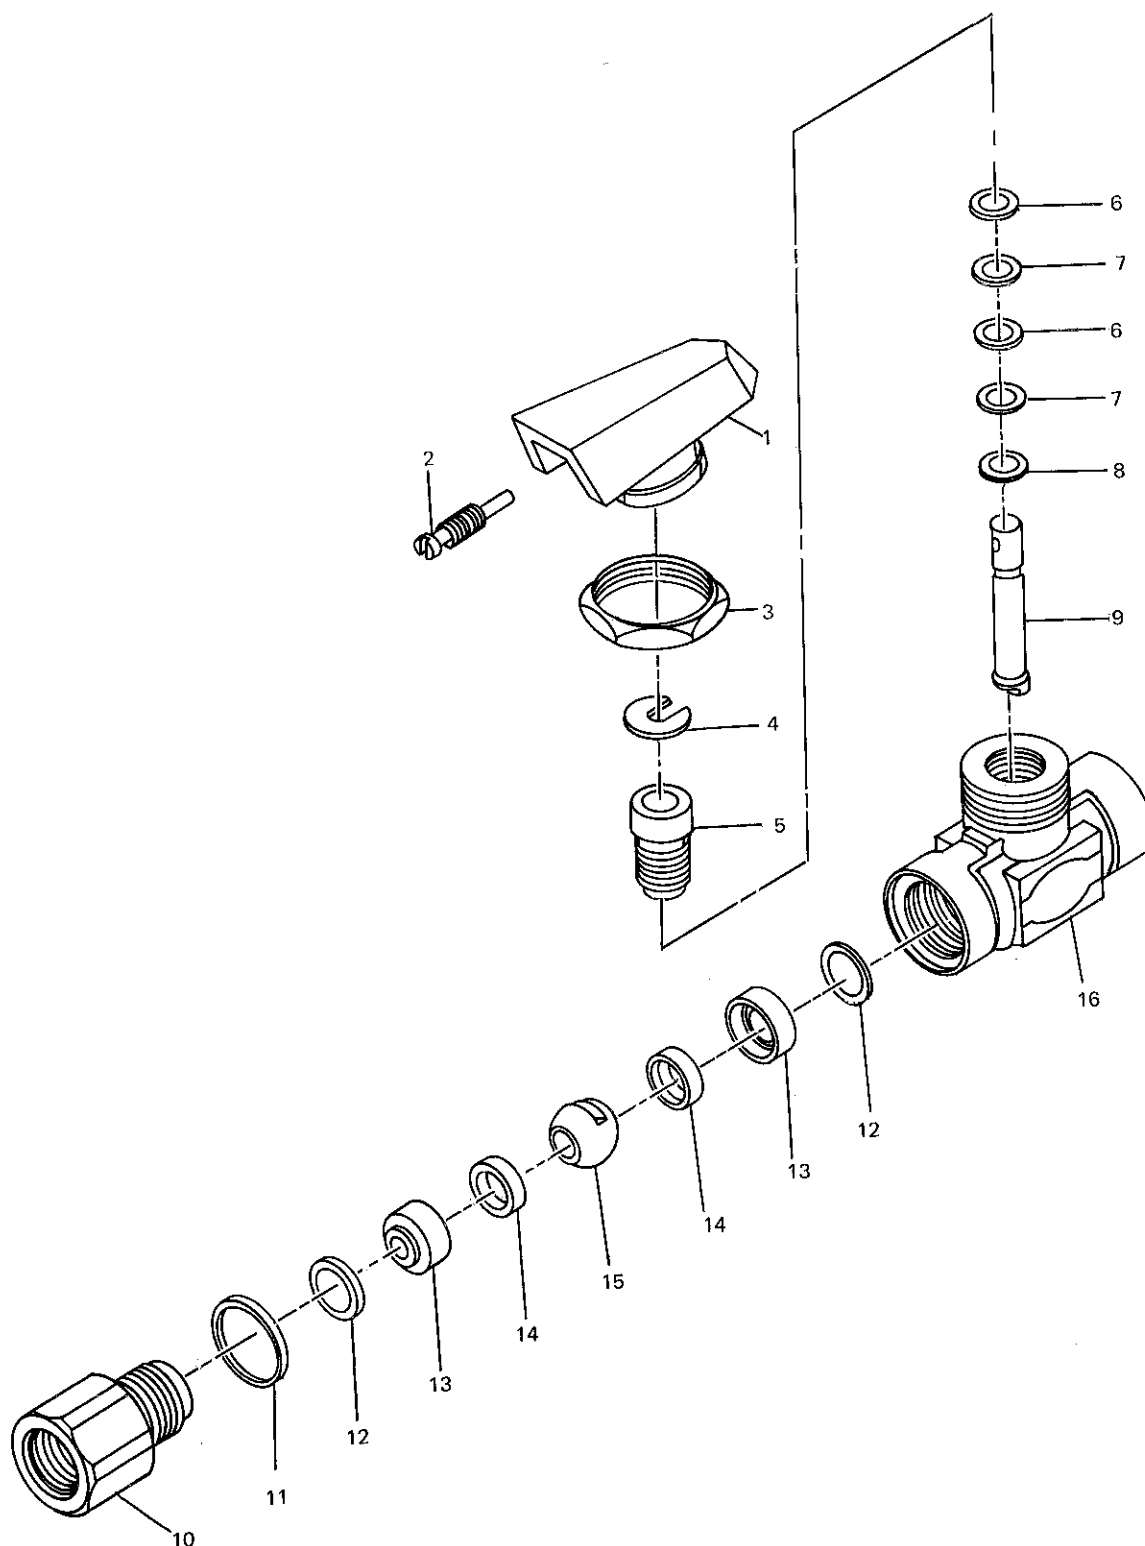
High Pressure Bleed Valve (Sheet 1 of 2)
